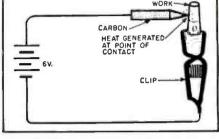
Basic circuit used in resistance soldering. While similar to arc welding, no attempt is made to draw such an arc.
